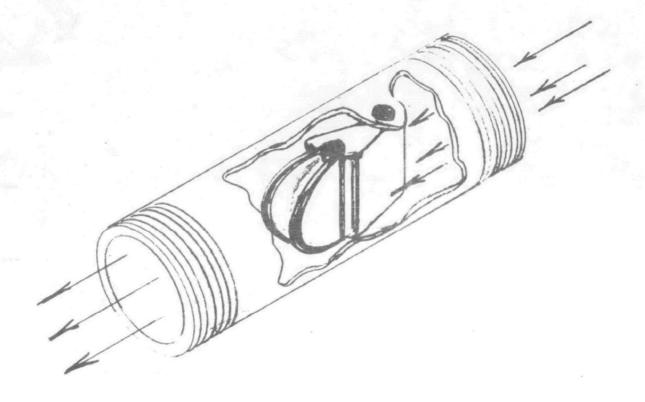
Technocheck Check Valve (Techno Corporation, Erie, Pa.).
